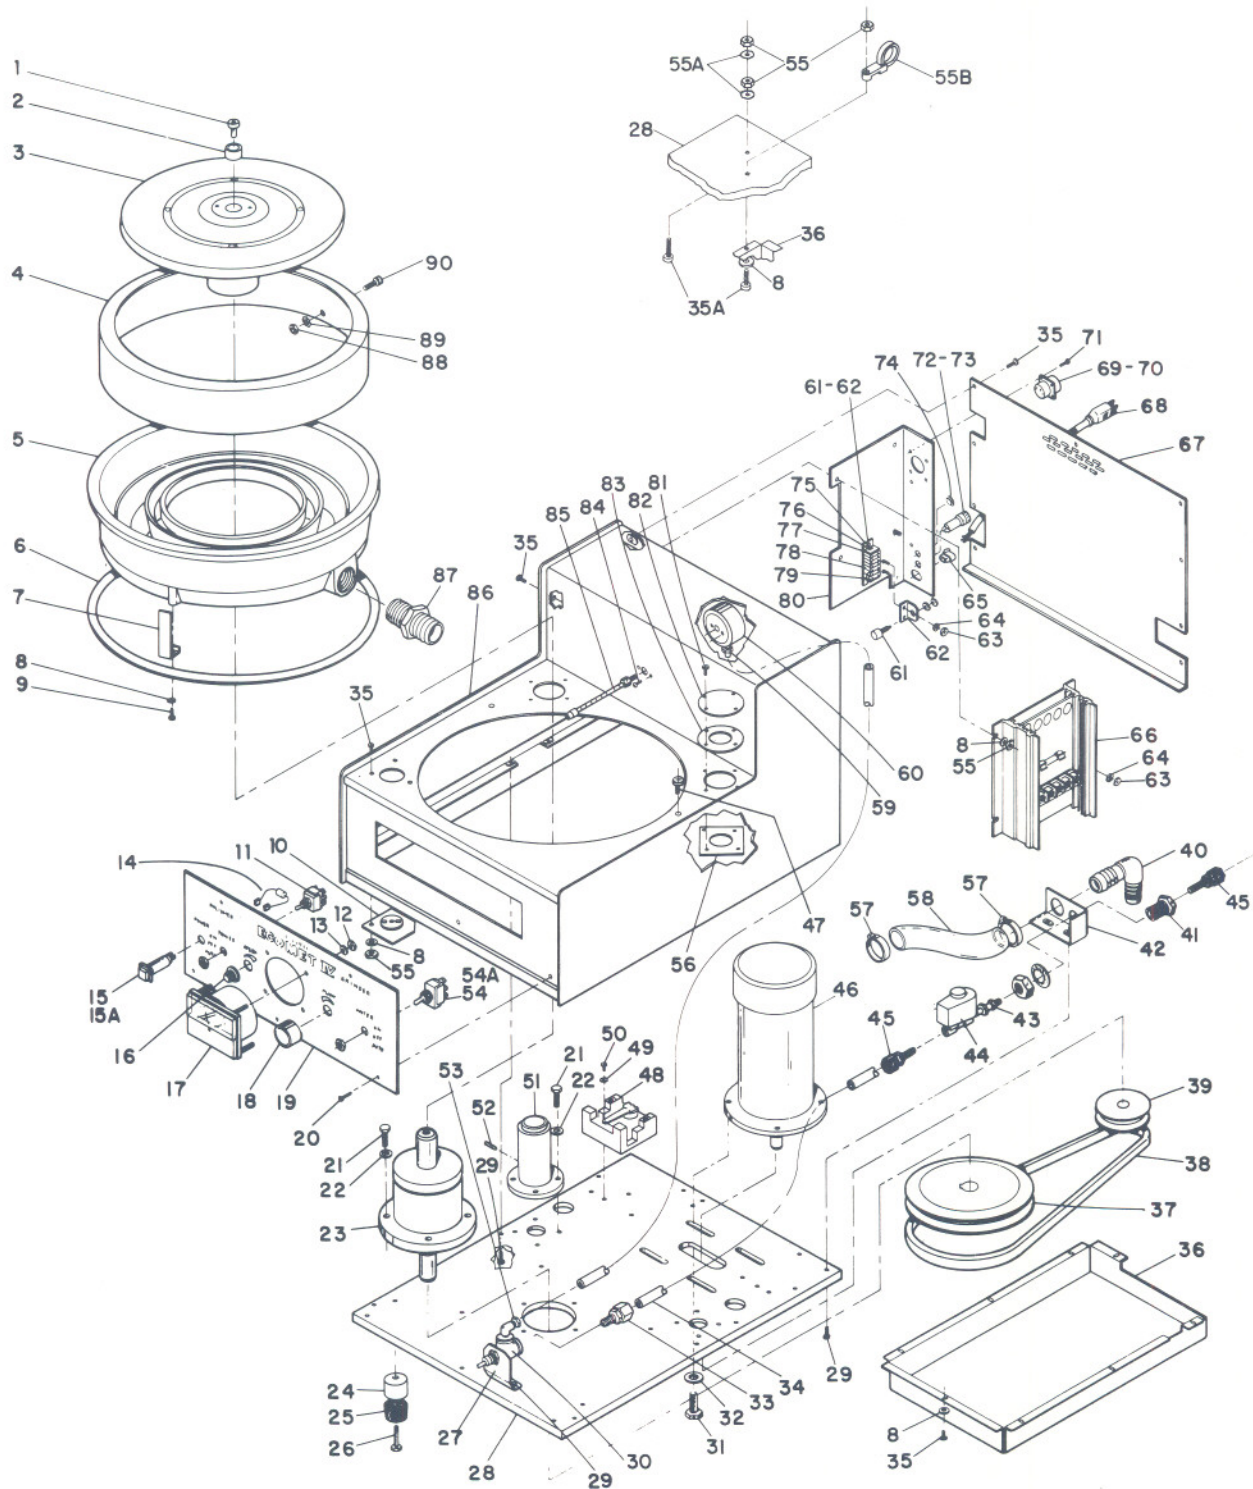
ECOMET® IV GRINDER/POLISHER ASSEMBLY DETAIL
